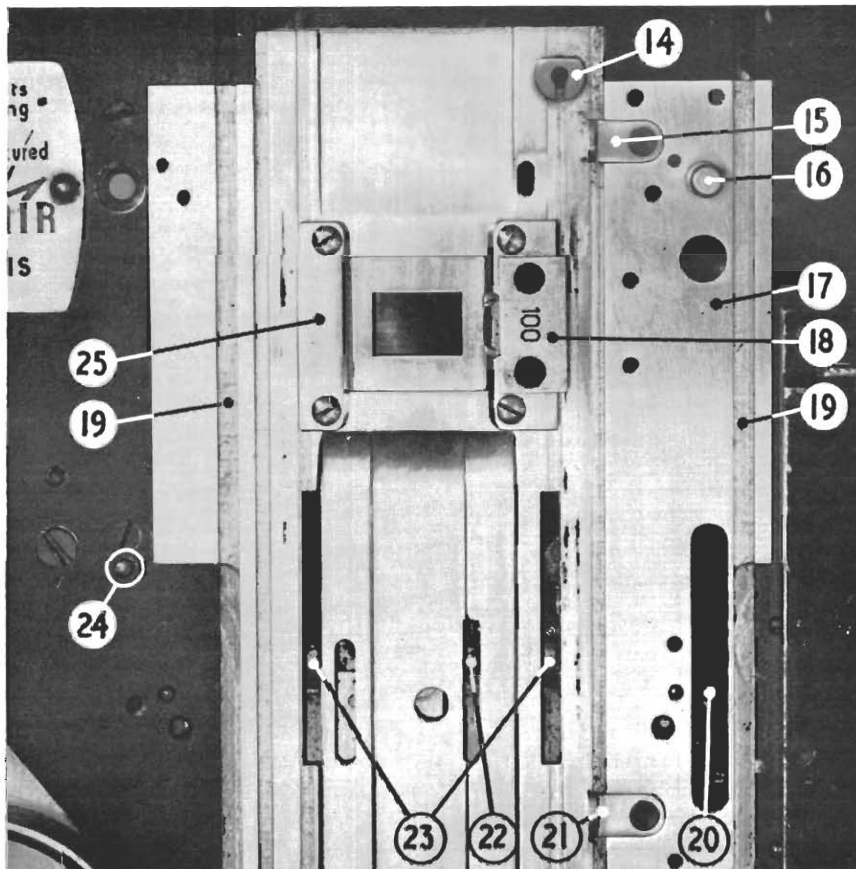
Assembly plate, viewed from rear of camera, showing 16-mm gate in position
